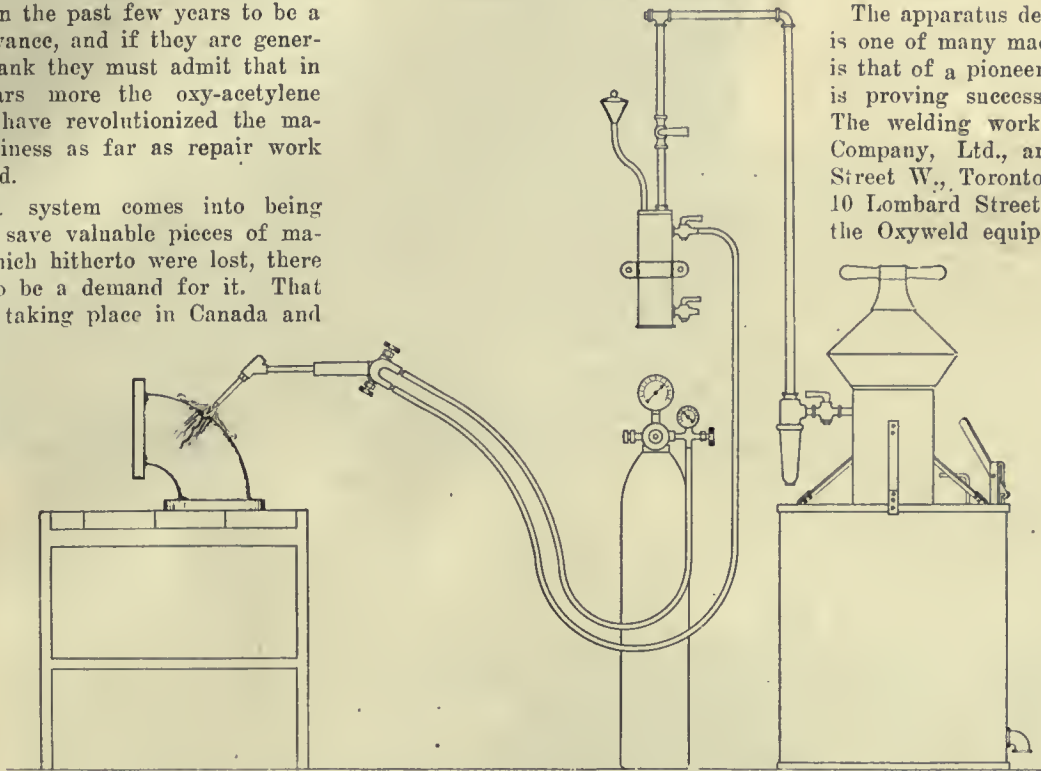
A COMPLETE OXYWELD EQUIPMENT.
